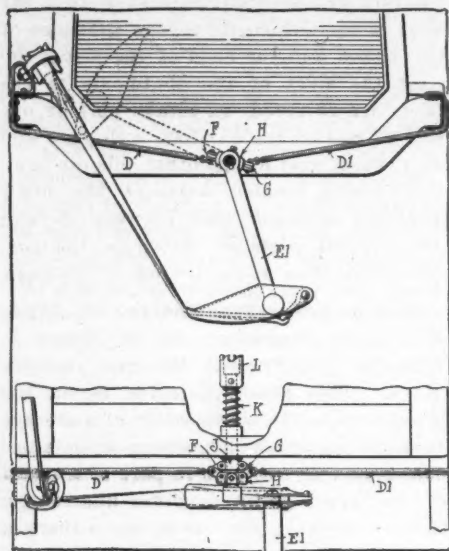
DETAILS OF PULL-MAN MOTOR STARTING DEVICE
